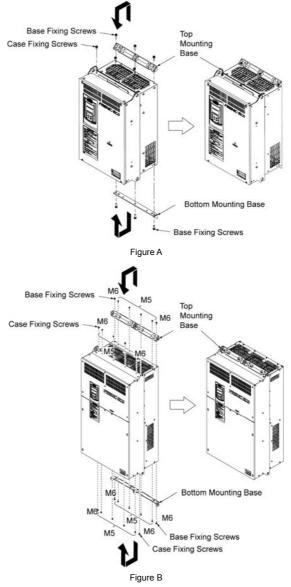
Relocating the Top and Bottom Mounting Bases
